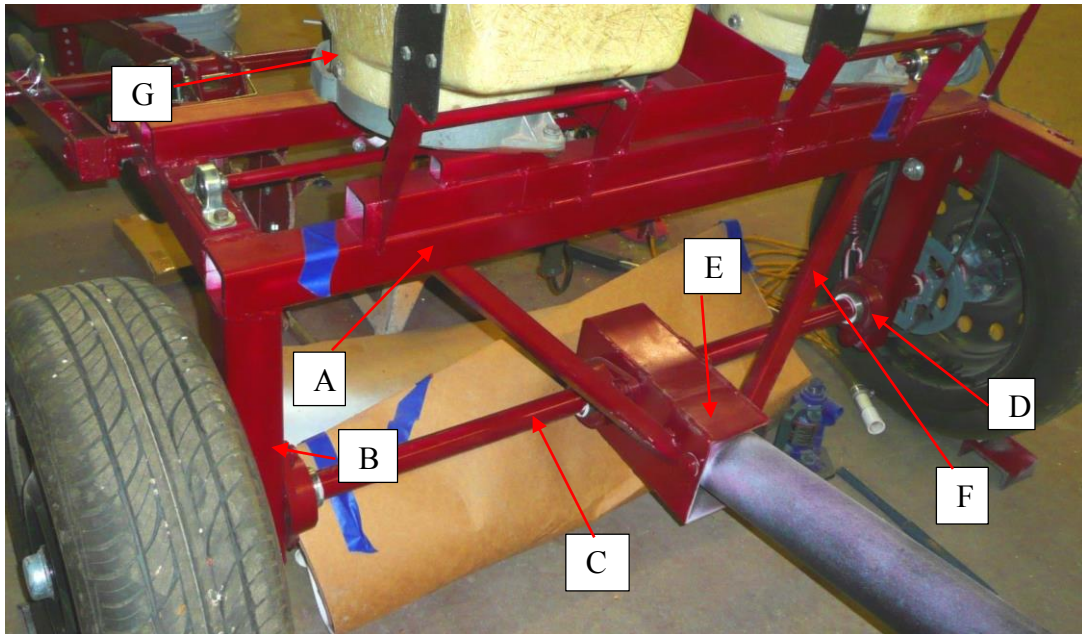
Original Prototype Constructed frame. A) Horizontal frame piece B) Leg frame piece C) Axle D) Flange bearings E) Tongue box F) Tongue Support piece G) Seed hopper.
